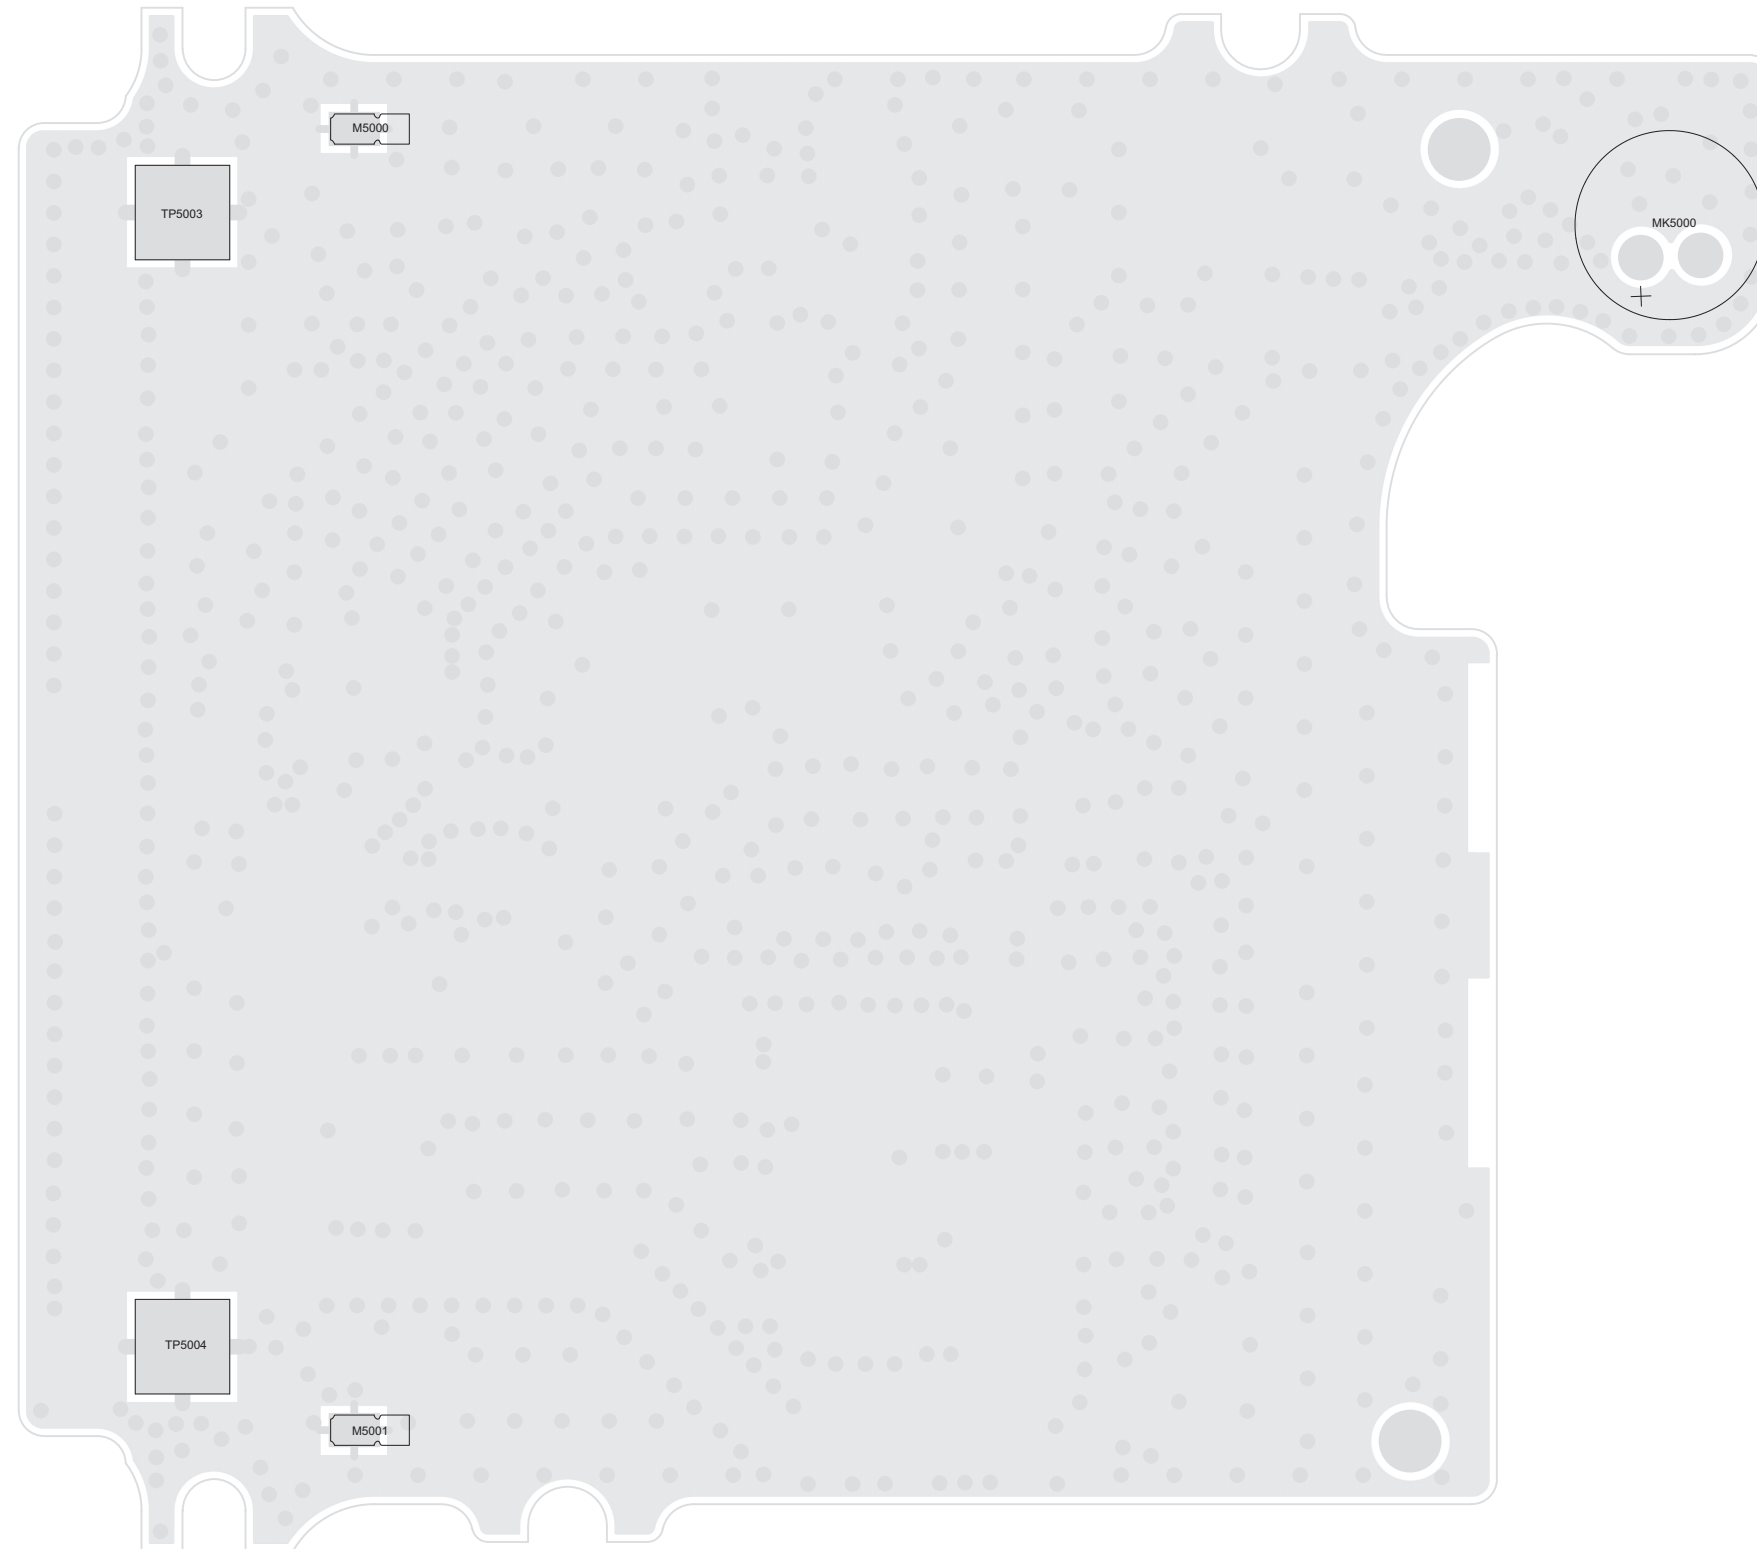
Interface Board Top Side PCB No. PC000864A01\_AA
